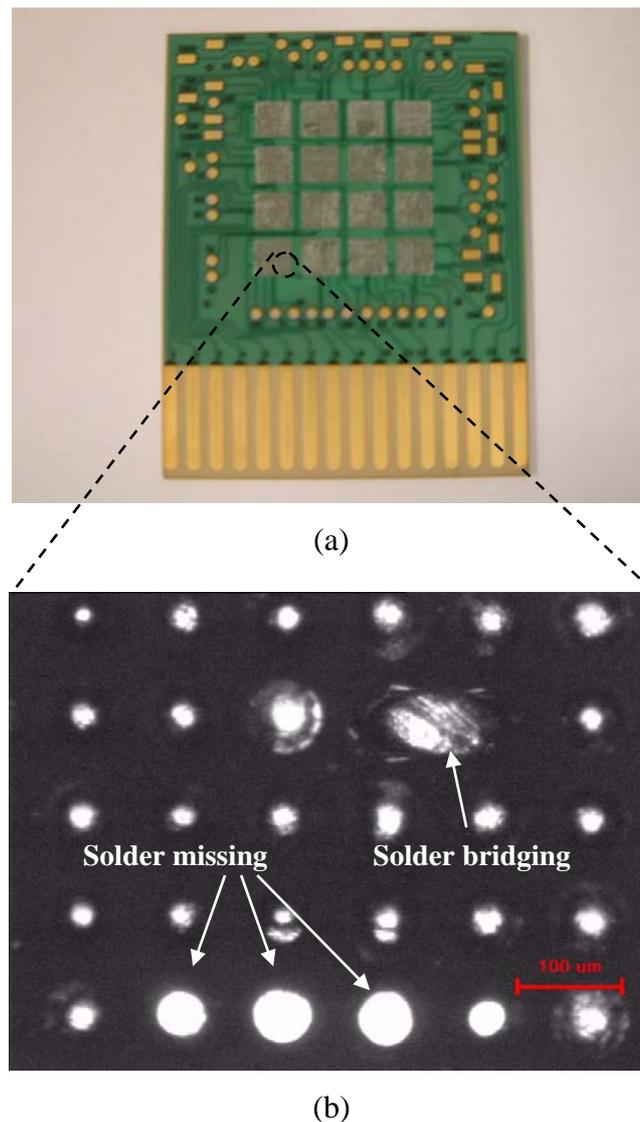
Photograph of 100µm-pitch BT test board with solder finish (a) full view; (b) defects of solder finish
